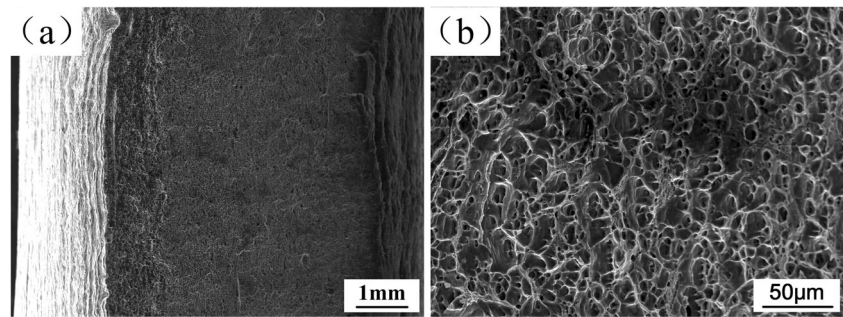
Tensile fracture morphologies of the fractured specimen at shoulder rotation speed of 400 rpm. (a) Overall morphology. (b) High magnification
